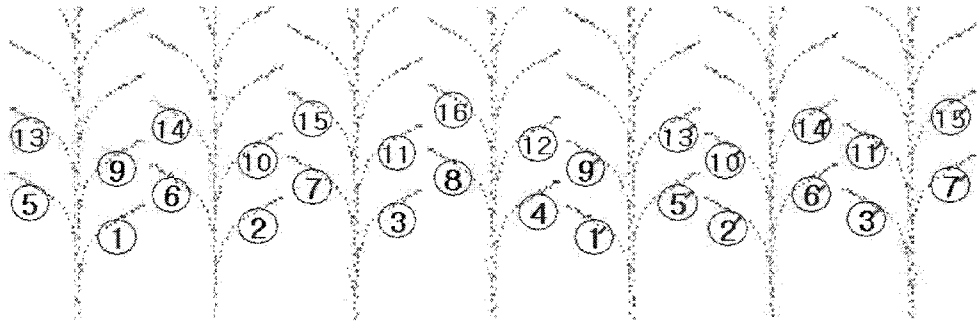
The pattern and order of rotary blades of cutting soil-surface
